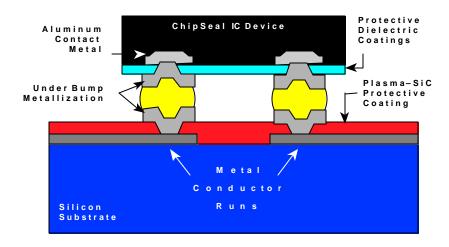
Schematic Cross-Section of a Solder Bumped ChipSeal Processed IC and Test Substrate for Flip-Chip Reliability Evaluations
